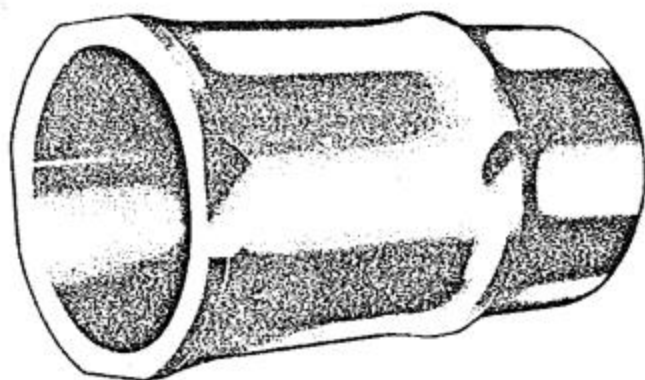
Fitting piston into cylinder sleeve employing a ring compressor
